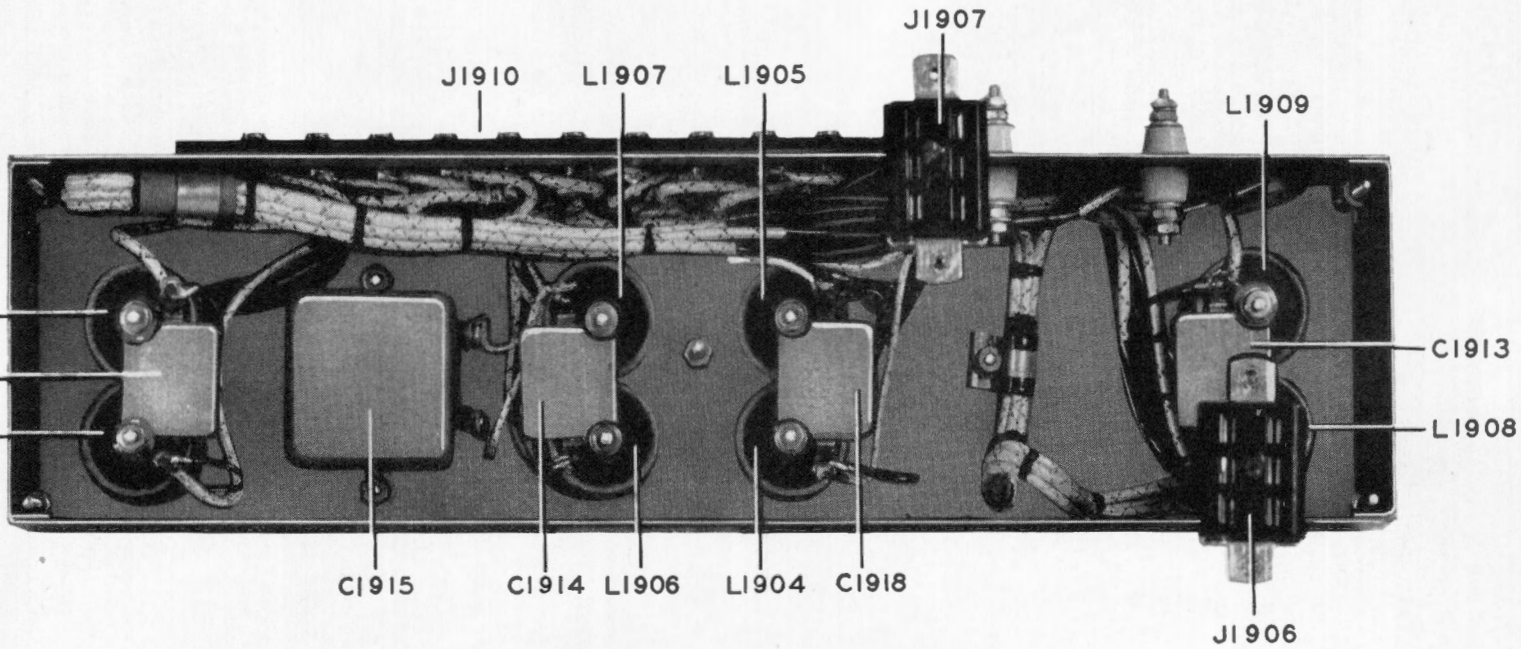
Dynamotor Assembly Noise Filter Box—Bottom View
